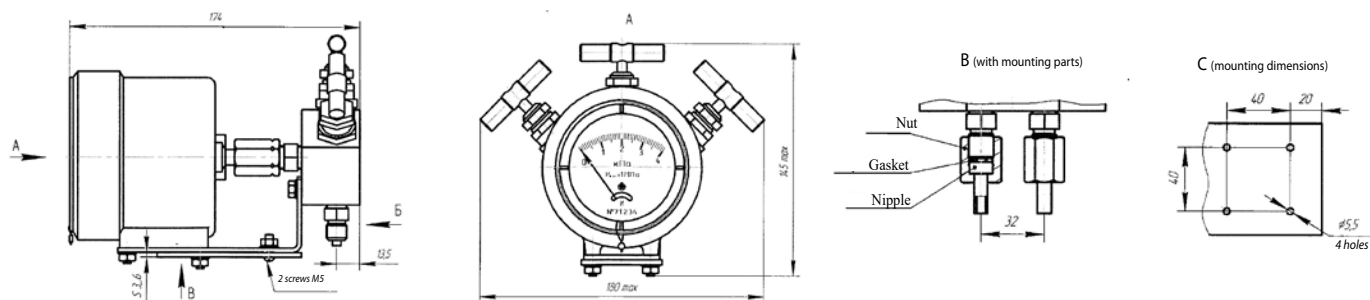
Overall and attachment dimensions of differential pressure gauge ДСП-80В ПАСКО
